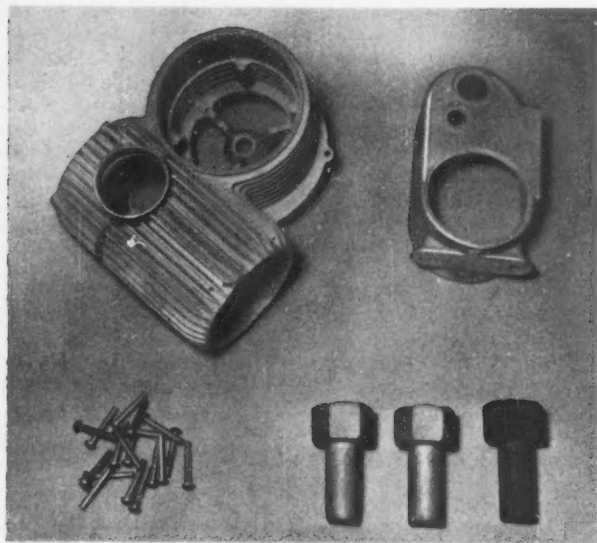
Some Examples of Components, Suitable for Treatment in the Barrel Vapour Blasting Machine, which would Otherwise be Difficult to Process Automatically
